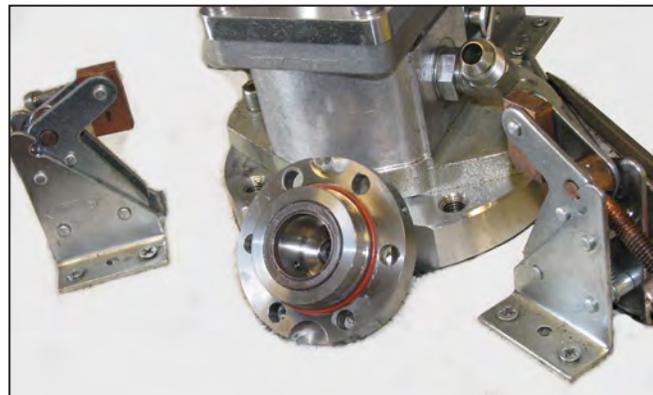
Thrust housing cap removed. Note the O-ring seal and the slots for the screwdrivers. Make sure the cap and O-ring is in good condition and clean.
